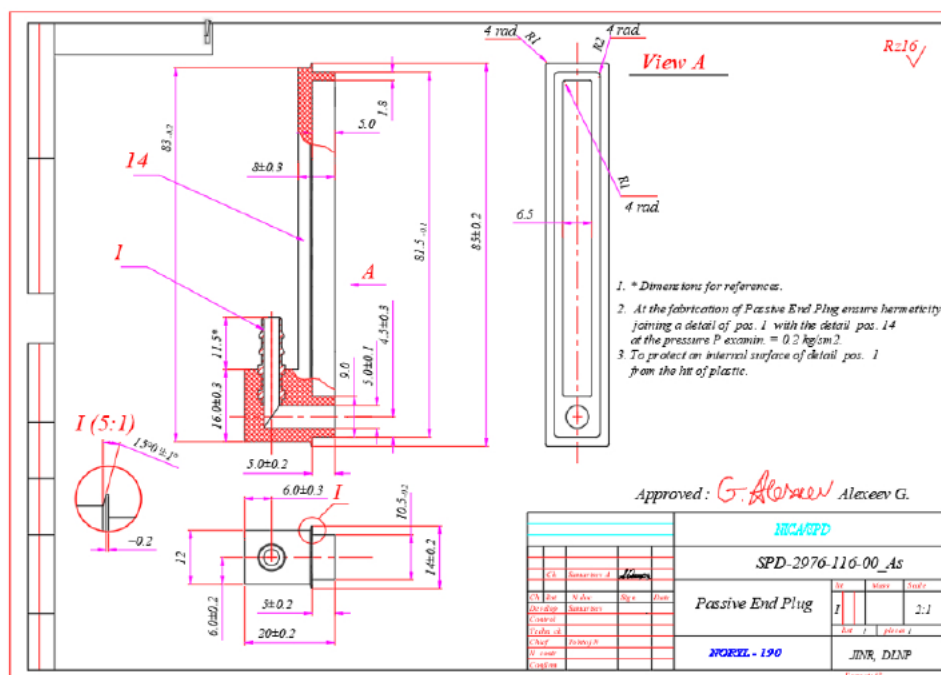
Drawing of the passive end-plug which contains only the gas connector.
